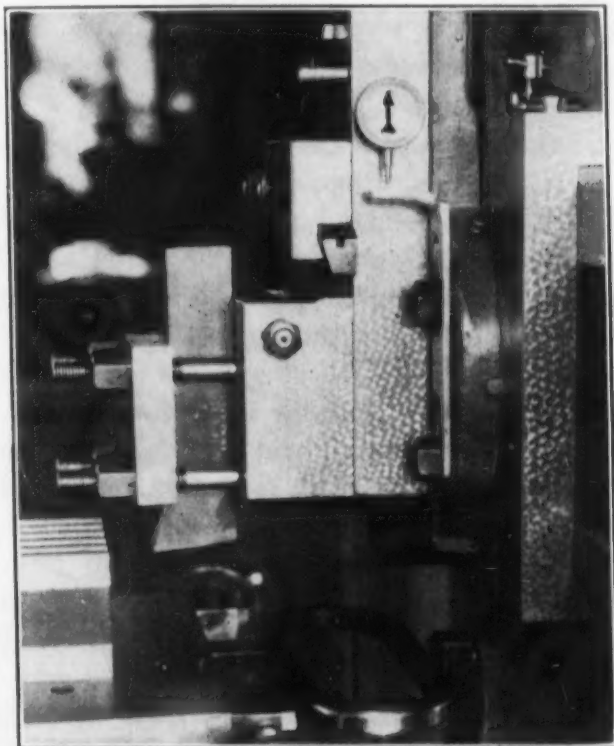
Arrangement of Planer Tool for Determining Machinability.
